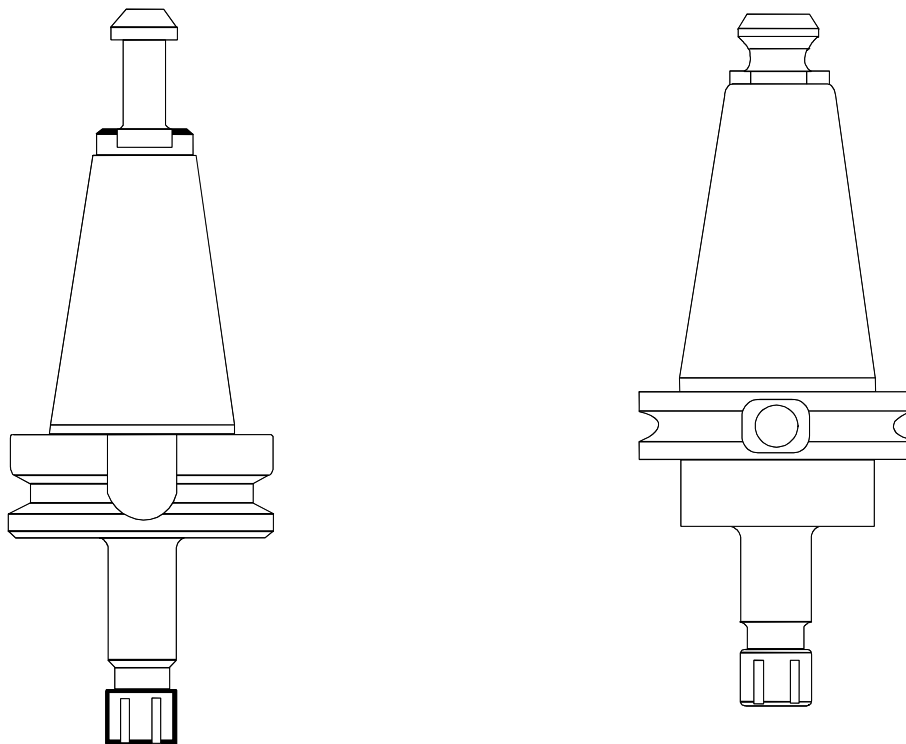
Adapter shapes for a) BT style; b) ANSI CAT-V style for CNC machining centres.
